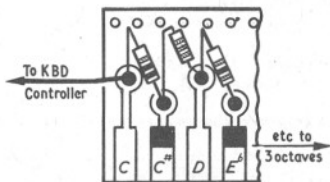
(a). Wiring of the edge connector strip as used on the prototype. Resistors are wired in from the conductor side of the board. Excess wire on the other side of the p.c.b. should be trimmed off and filed flush so that the board may be glued to the front panel
